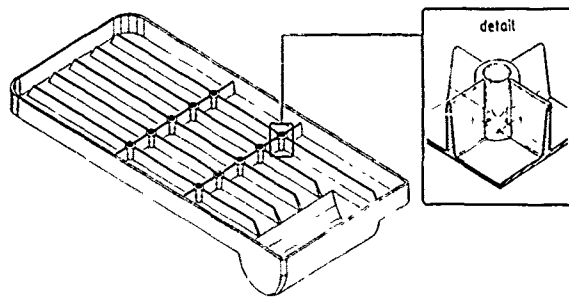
Optimized ribbing on a paper cutting machine (view from below)
